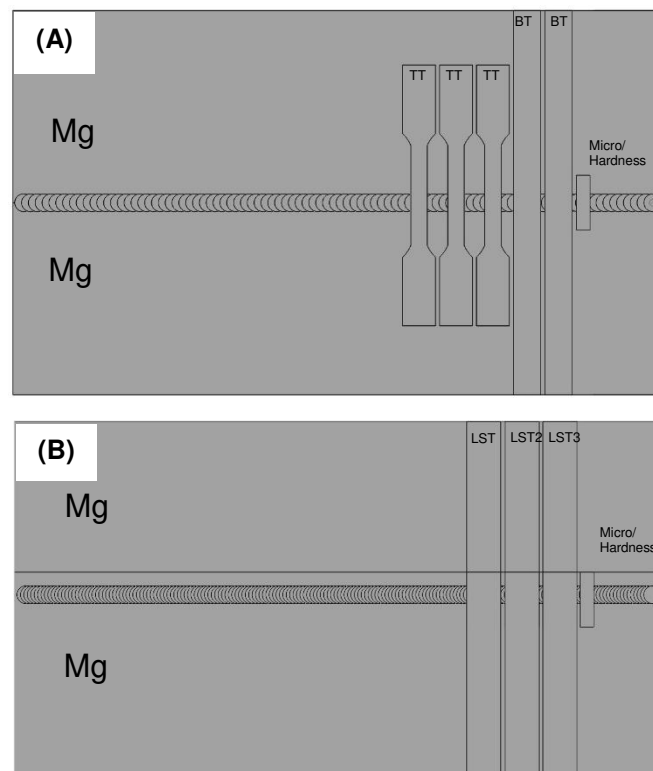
Schematic drawing of the location of the sample in the welds of the (A) butt, and (B) overlap configuration.
